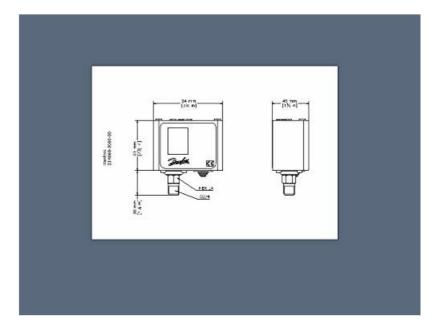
Technical drawing illustrating the dimensions of the Danfoss KP 35 pressure switch, including height, width, and depth, along with connection details.
